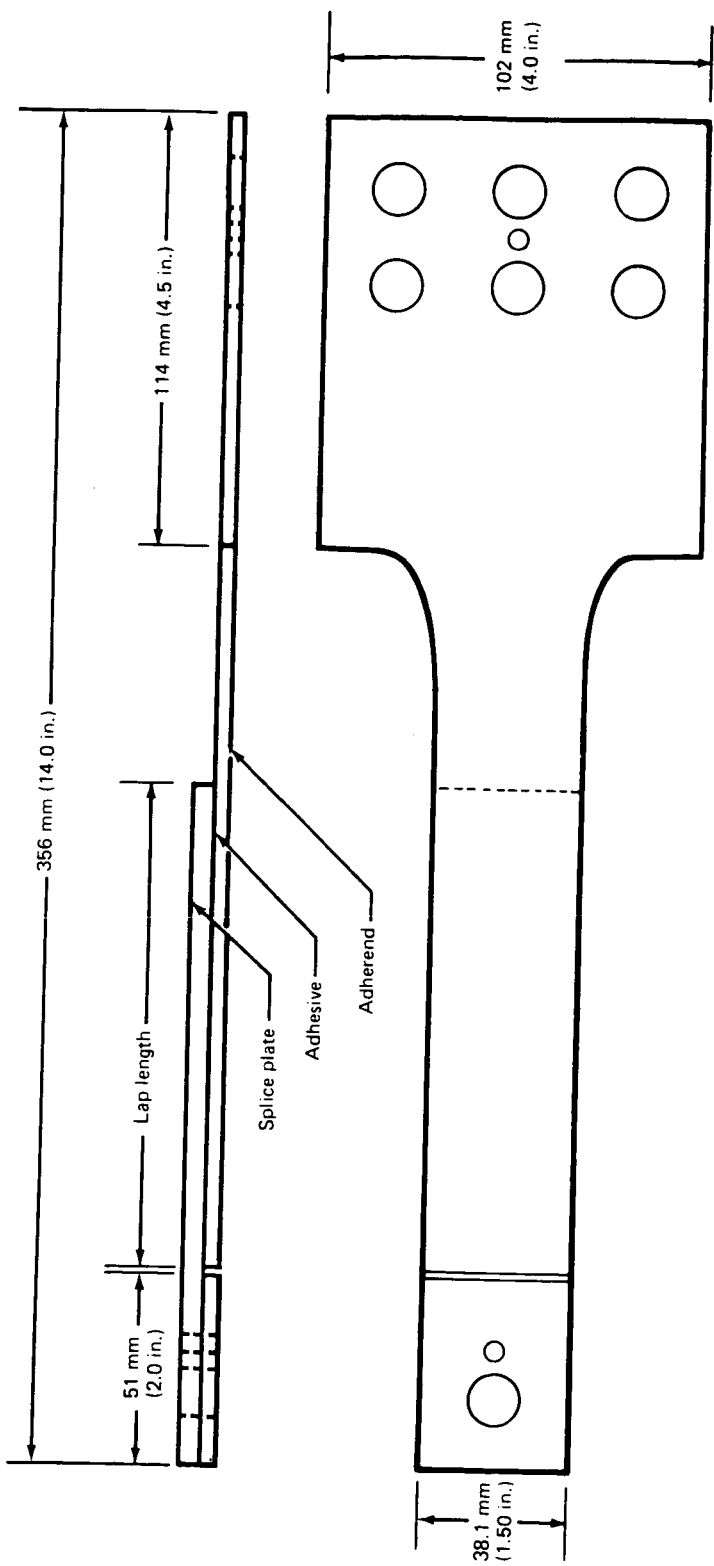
MODIFIED TEST SPECIMEN DESIGN
